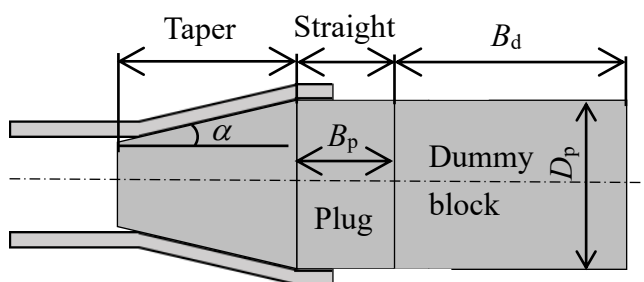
Geometrical parameters of plug and dummy block
